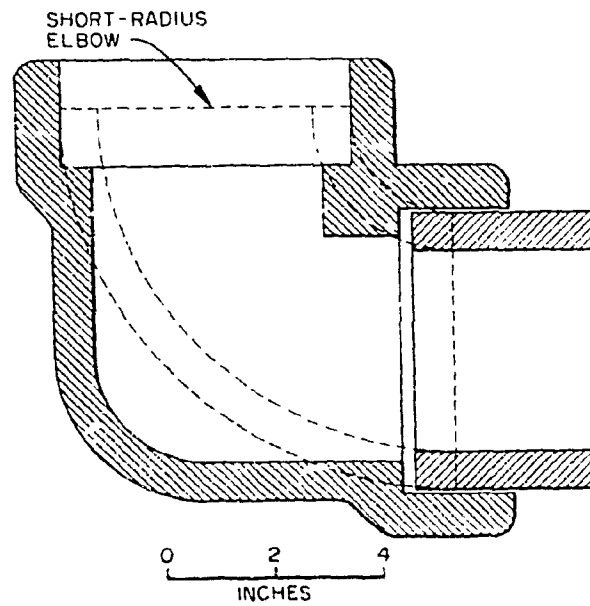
ANSI B16.11 90° elbow, 1-in., 3000-lb-class, sched-80 pipe.
